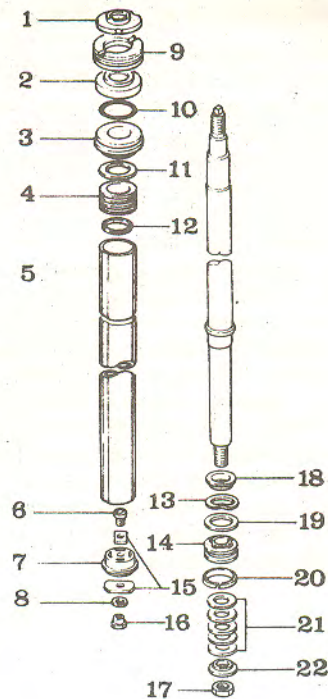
Exploded view of the inner shock absorber parts.
